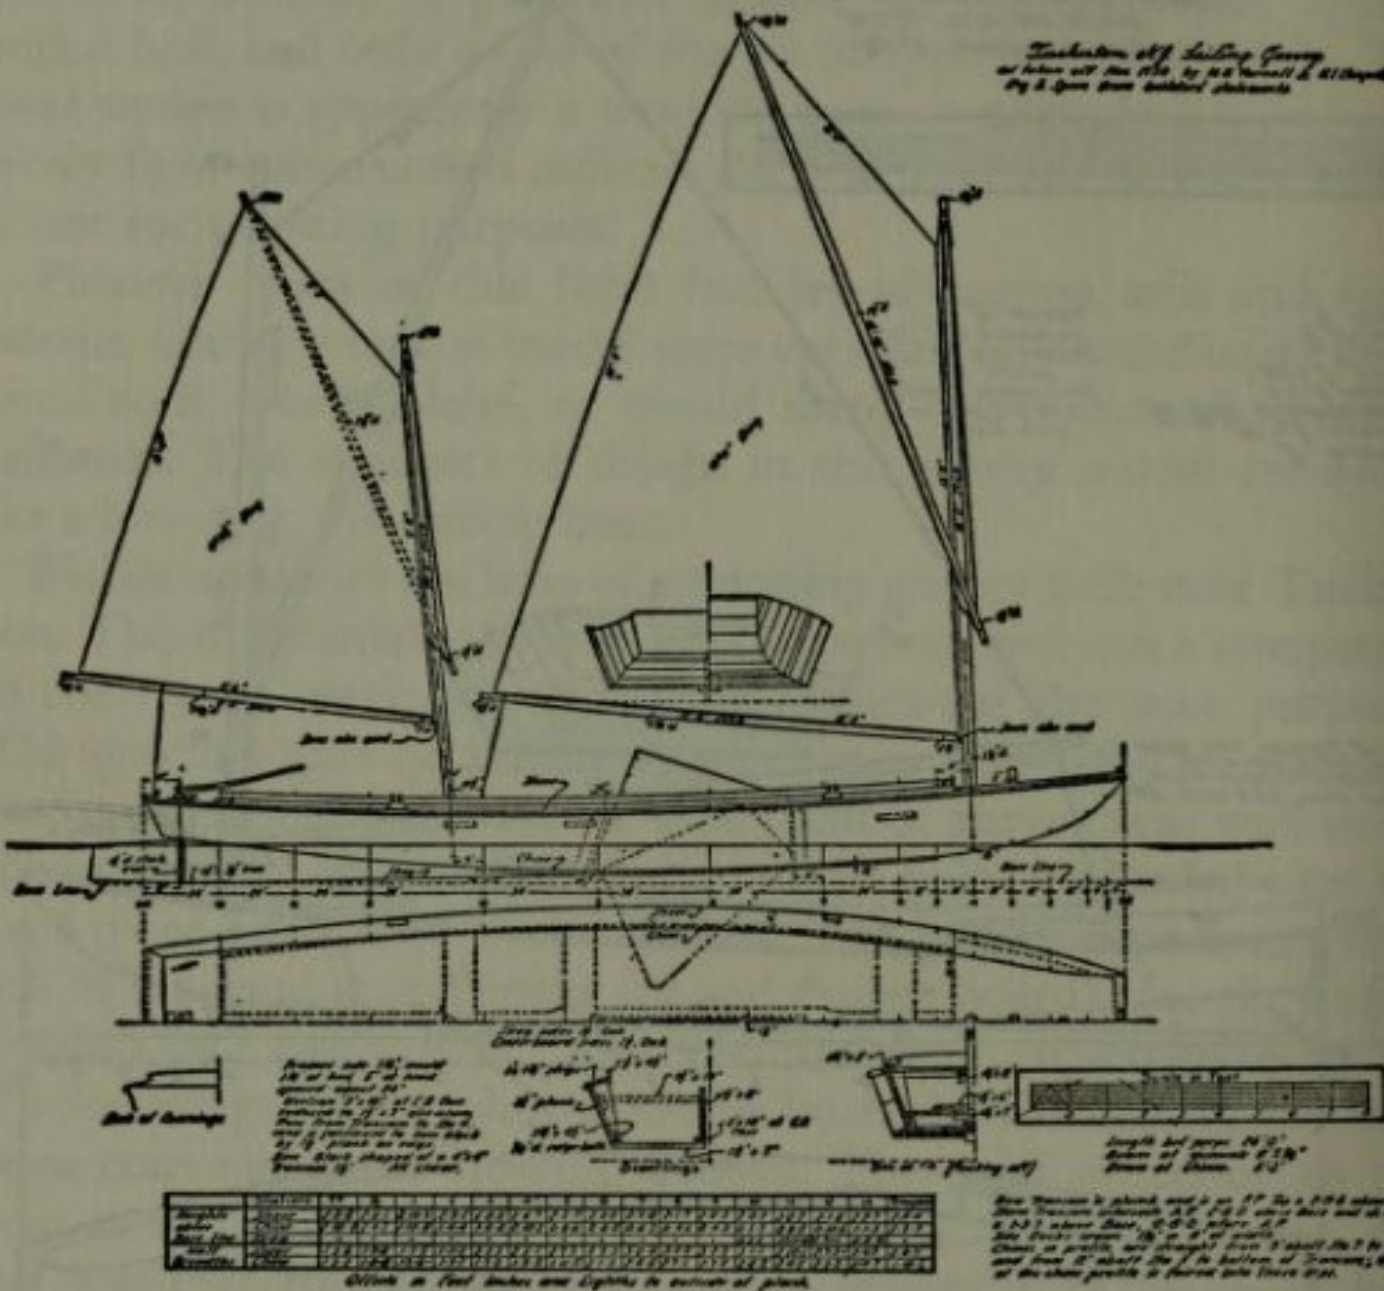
Typical New Jersey sailing garvey, two-masted rig, showing flat decks afore and abaft cockpit, as built at Tuckerton, New Jersey.
